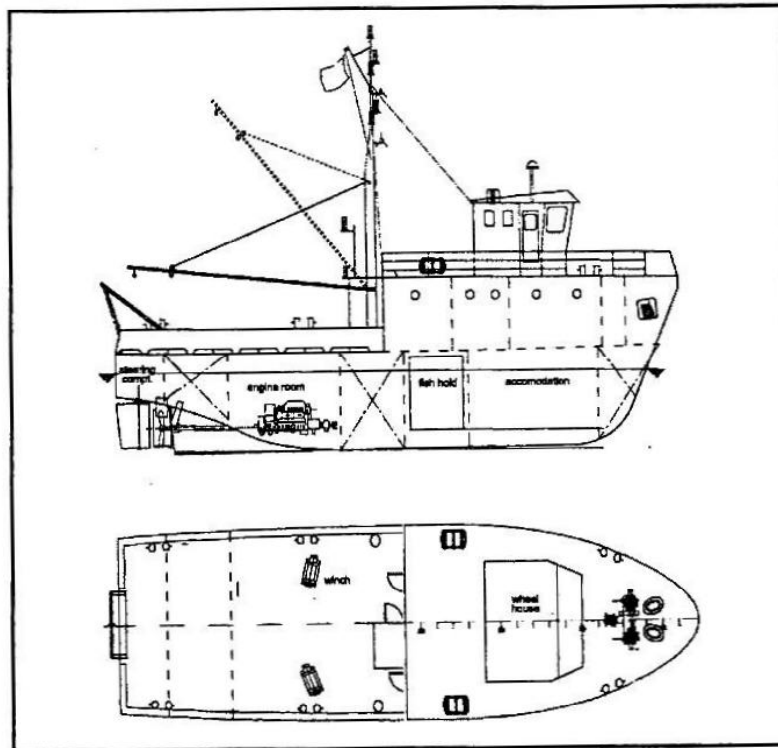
Profile and deck plan of a 17.5 m mechanised stern trawler
